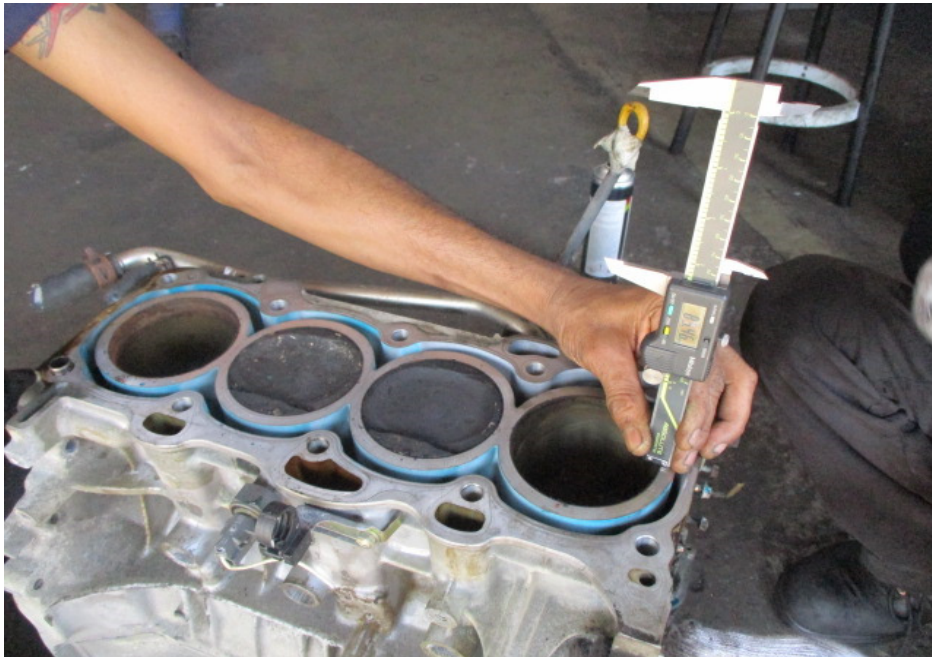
shows measurement being carried out to the bore (arrowed) of cylinder 1 of the Toyota engine. The measurements were carried out using a digital Vernier Caliper that was calibrated before the start of the measurements.
